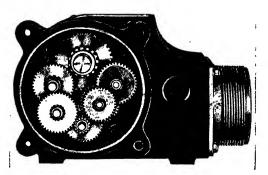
A view of the gear train in the wastegate motor. (Courtesy Minneapolis-Honeywell Regulator Company)
